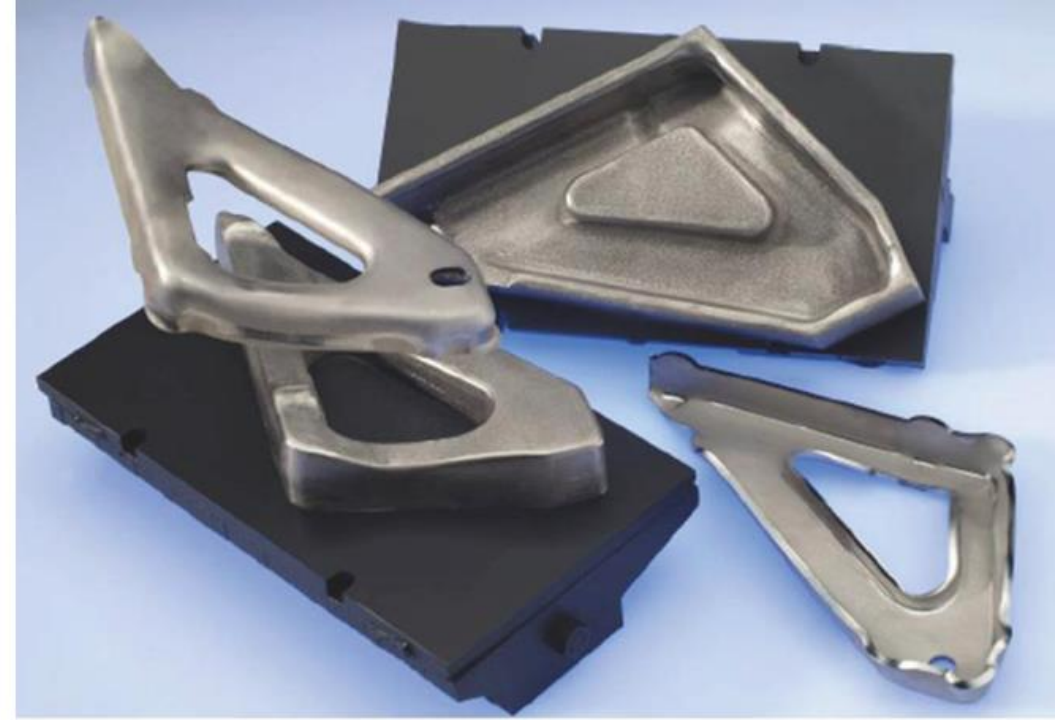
Laser melting, die for sheet metal processing, transformed parts (Source: MCP-HEK)
